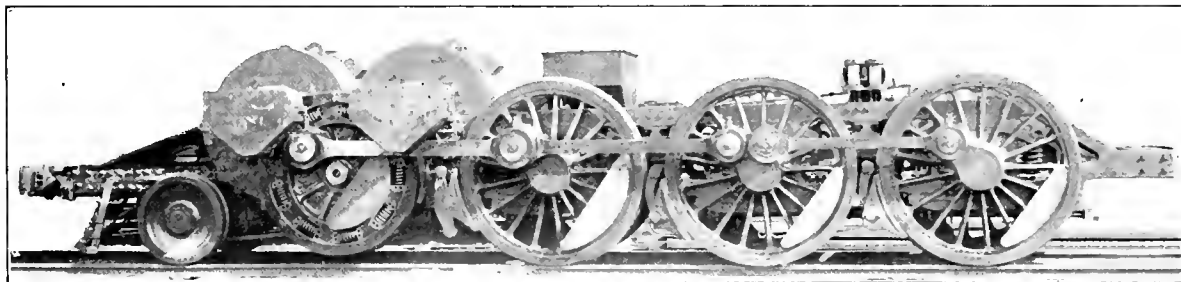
One of the Driving Trucks for the Pennsylvania Electric Locomotive Showing Motor and Spring Gear Jack Shaft
